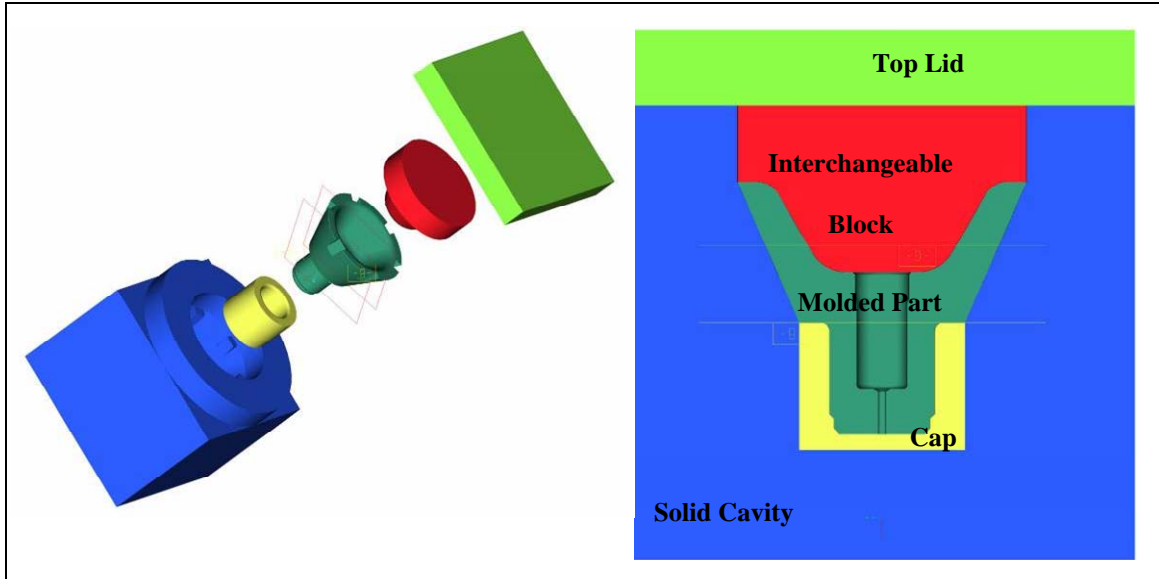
Molding concept for manufacturing of plastic tailcones: (a) exploded view and (b) cross section.
